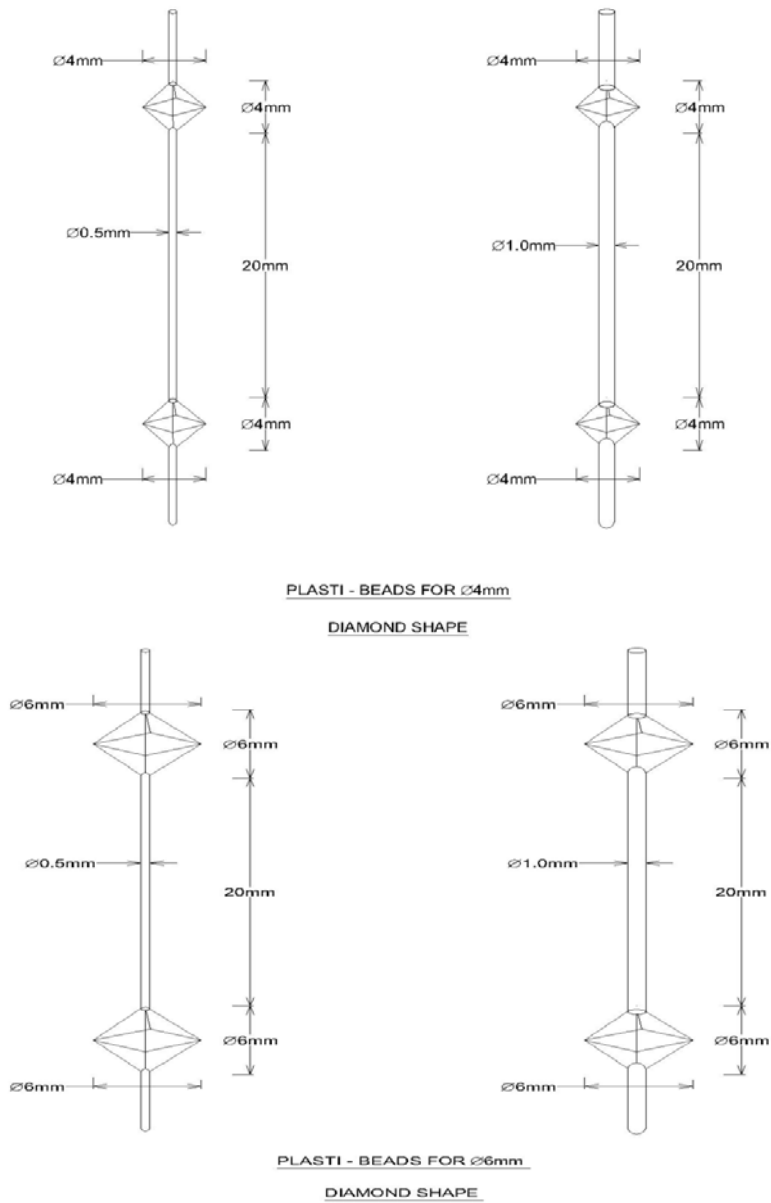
Shape and Dimension of Chained Interlocking Plastic beads.
